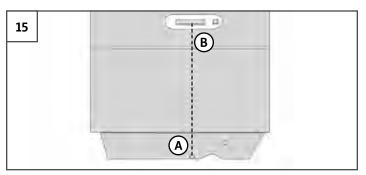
ALIGNING THE BOOM MOUNT CHANNEL
